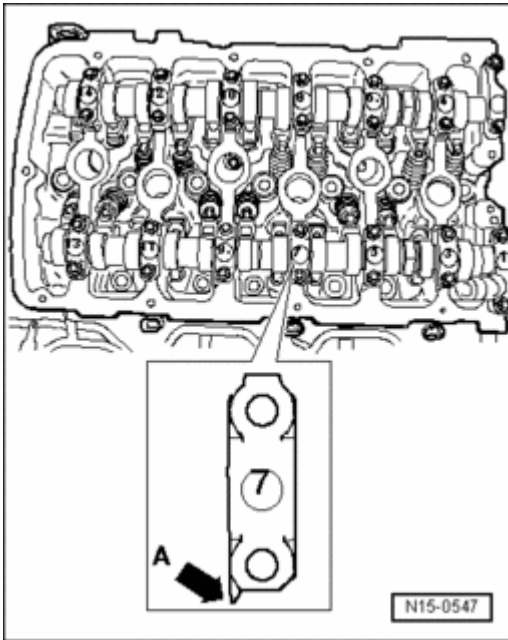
Installed Position Of Bearing Caps For Camshafts
